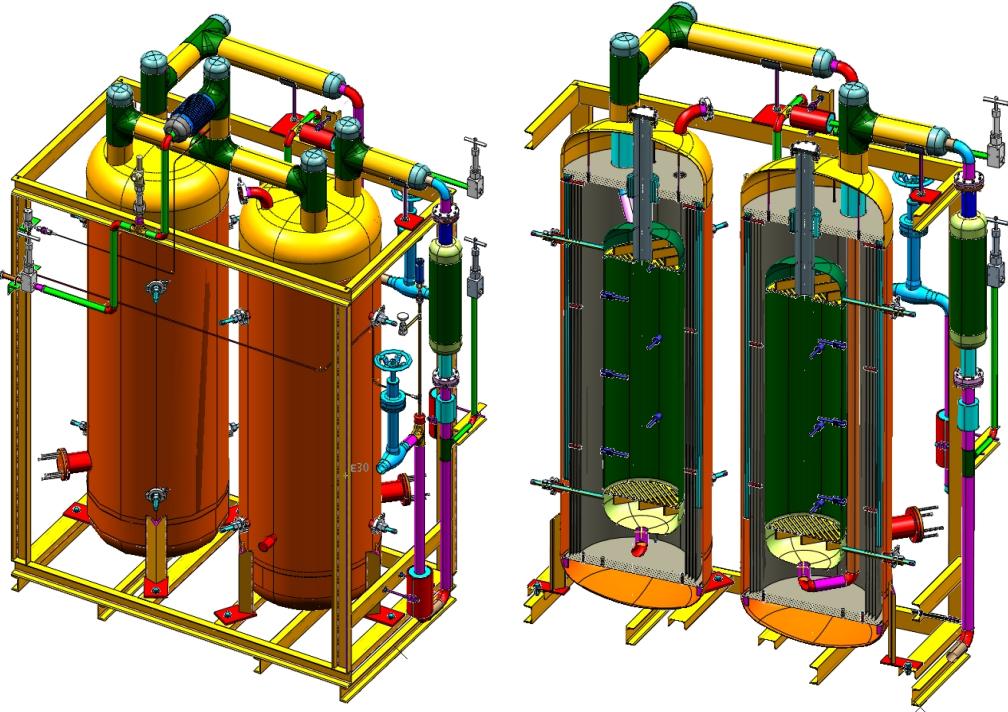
Three-dimensional rendering of a MicroBooNE filter skid. The left drawing shows the full skid, while the right drawing shows a cut-away of the vessels.
